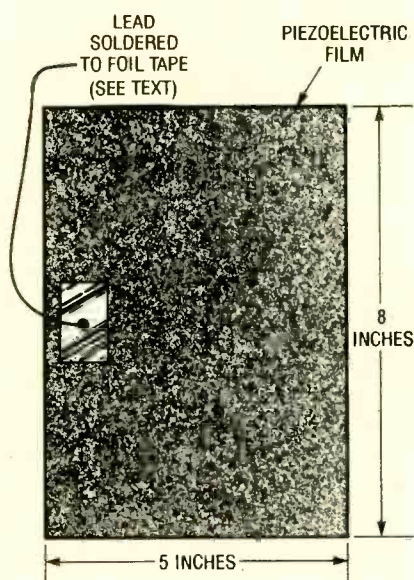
Solder a lead to a piece of copper-foil tape and then stick the tape on the piezoelectric film.
